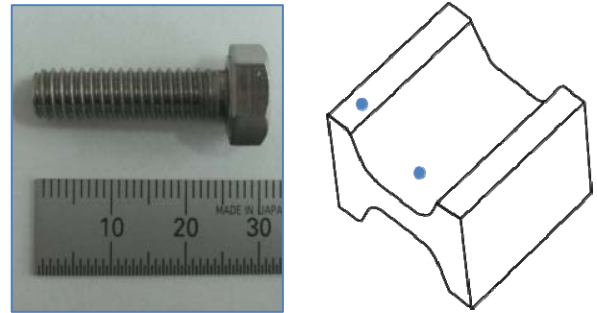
The picture of bolt used for testing and positions of bolts at the beam blank
